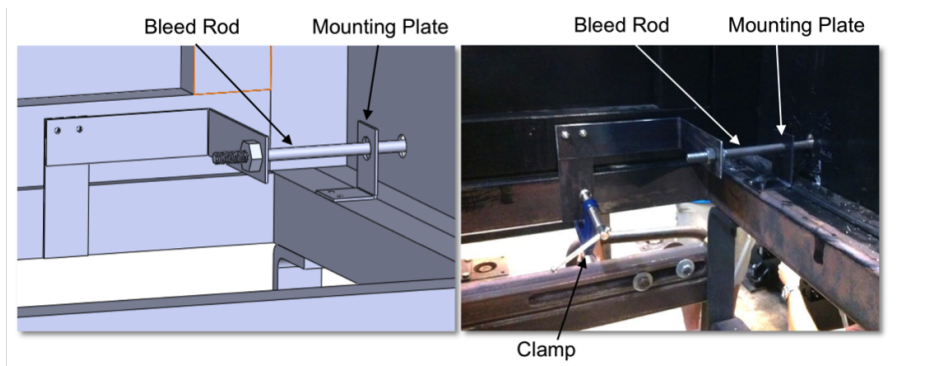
SolidWorks model and installed bleed rod end showing internal temporary mounting components
